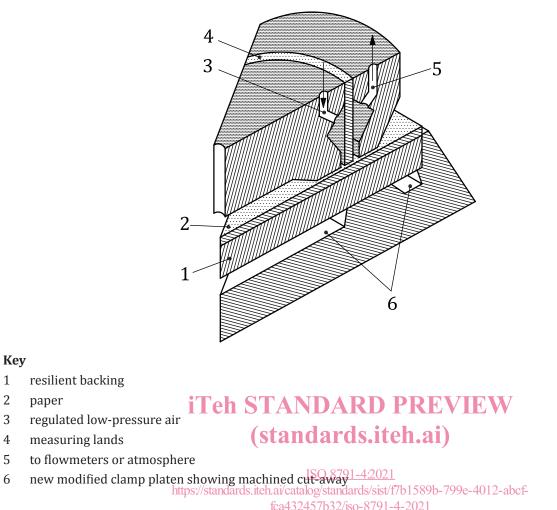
The sensing head sectioned on two radii showing cut-away platen
